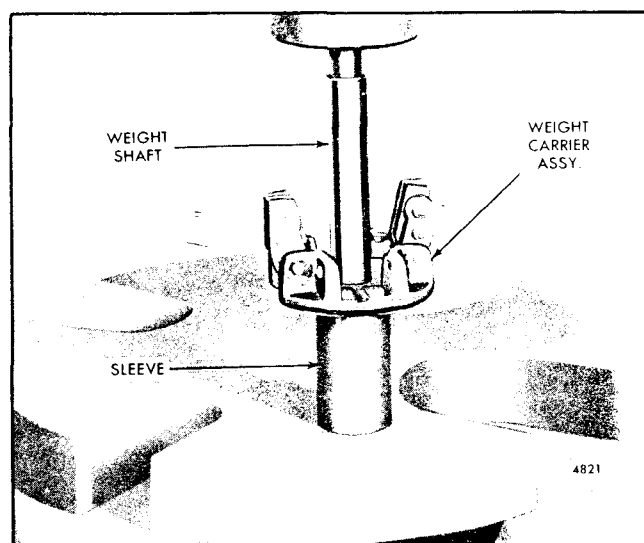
Removing Governor Weight Shaft from Weight Carrier Assembly
